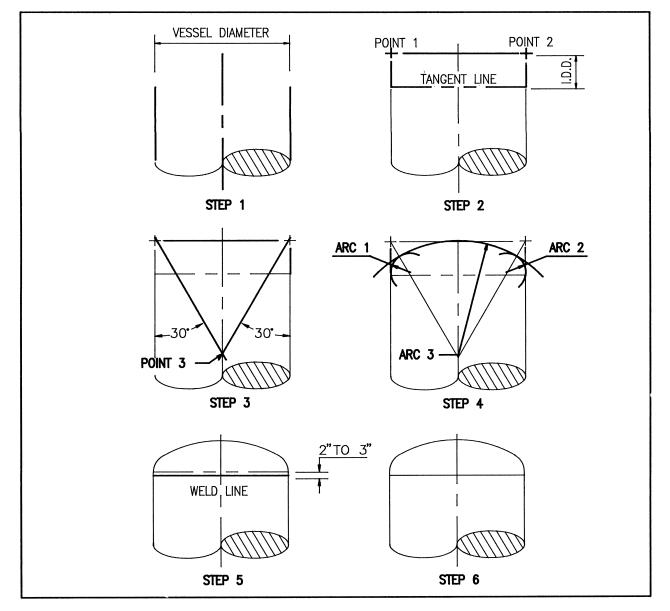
Steps for drawing a 2:1 Semi-elliptical head.
